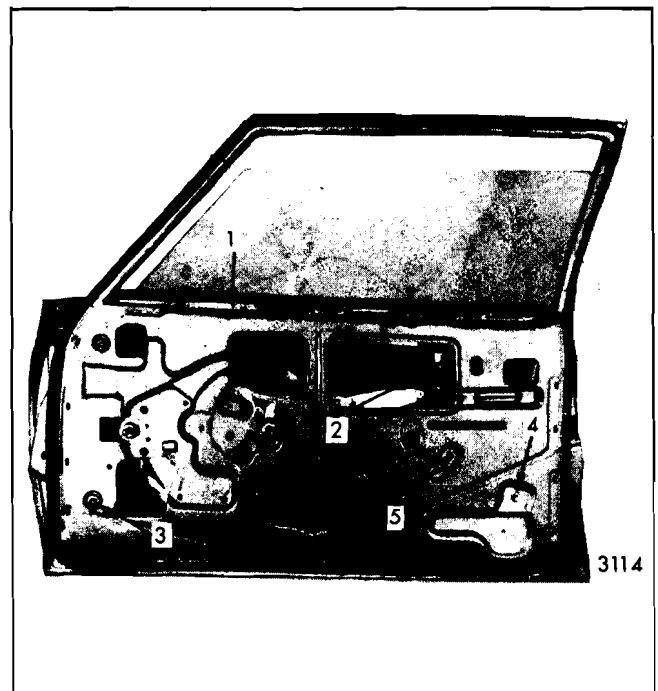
Front Door Window Removal and Adjustment - "B-11" Styles
